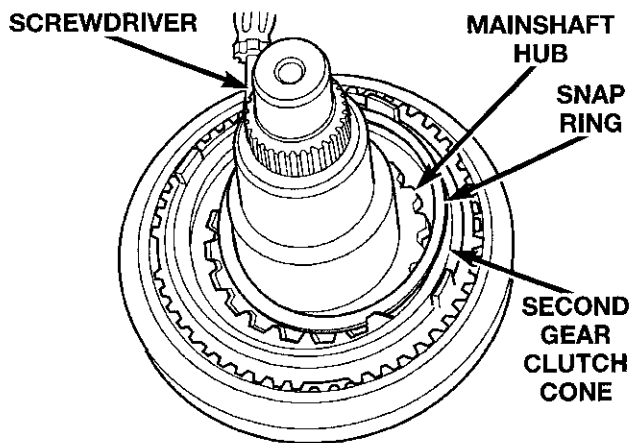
Installing Second Gear Clutch Cone Snap Ring
